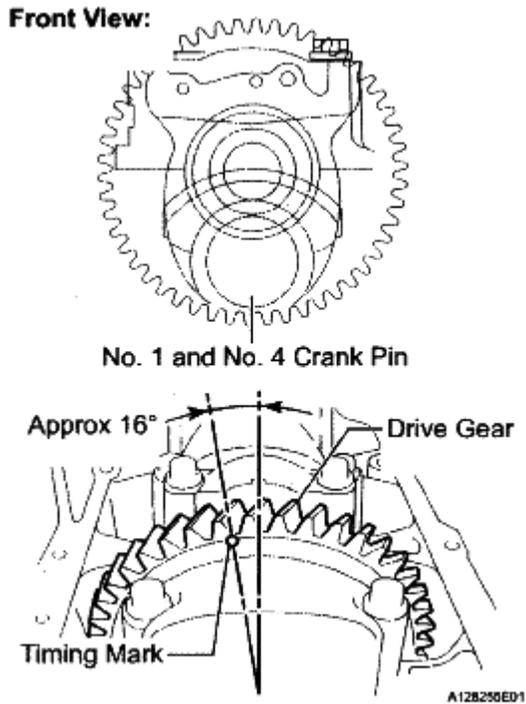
Identifying Timing Mark On Balancershaft Drive Gear
